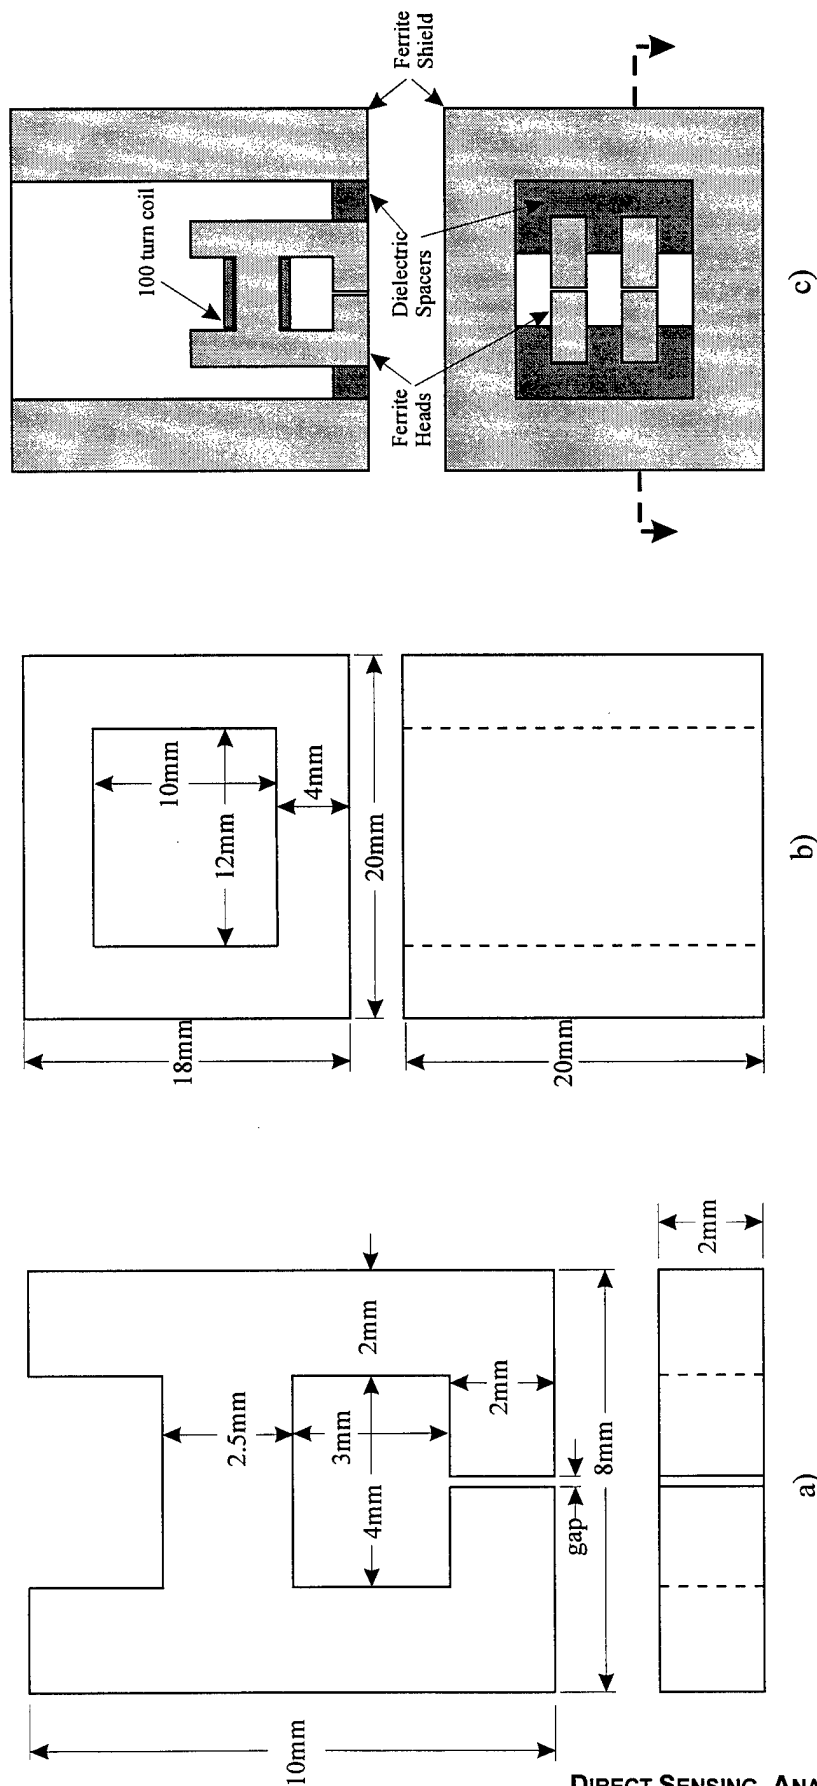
Shielded Differential H-type Probe: a) Ferrite H Head; b) Ferrite Shield; c) Assembly Drawing
